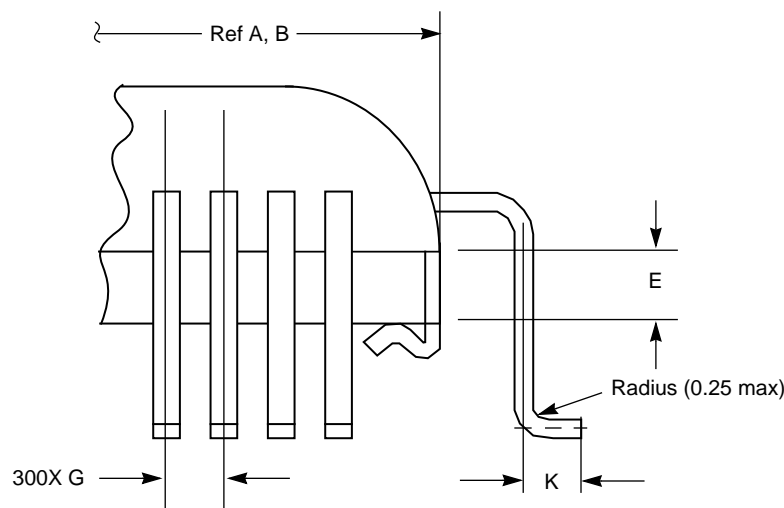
IBM C4-CQFP Mechanical Dimensions—View P
